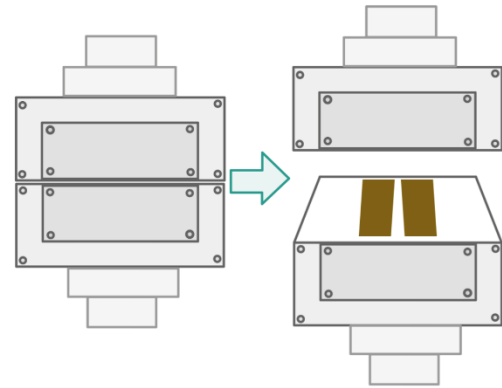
Block Diagram of a Mold Press which shows how one manual mold shot looks like in a mold machine.
